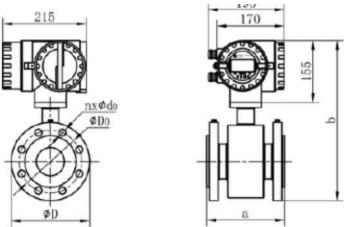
Overall dimensions and connection dimensions of MGH integrated electromagnetic flowmeter
